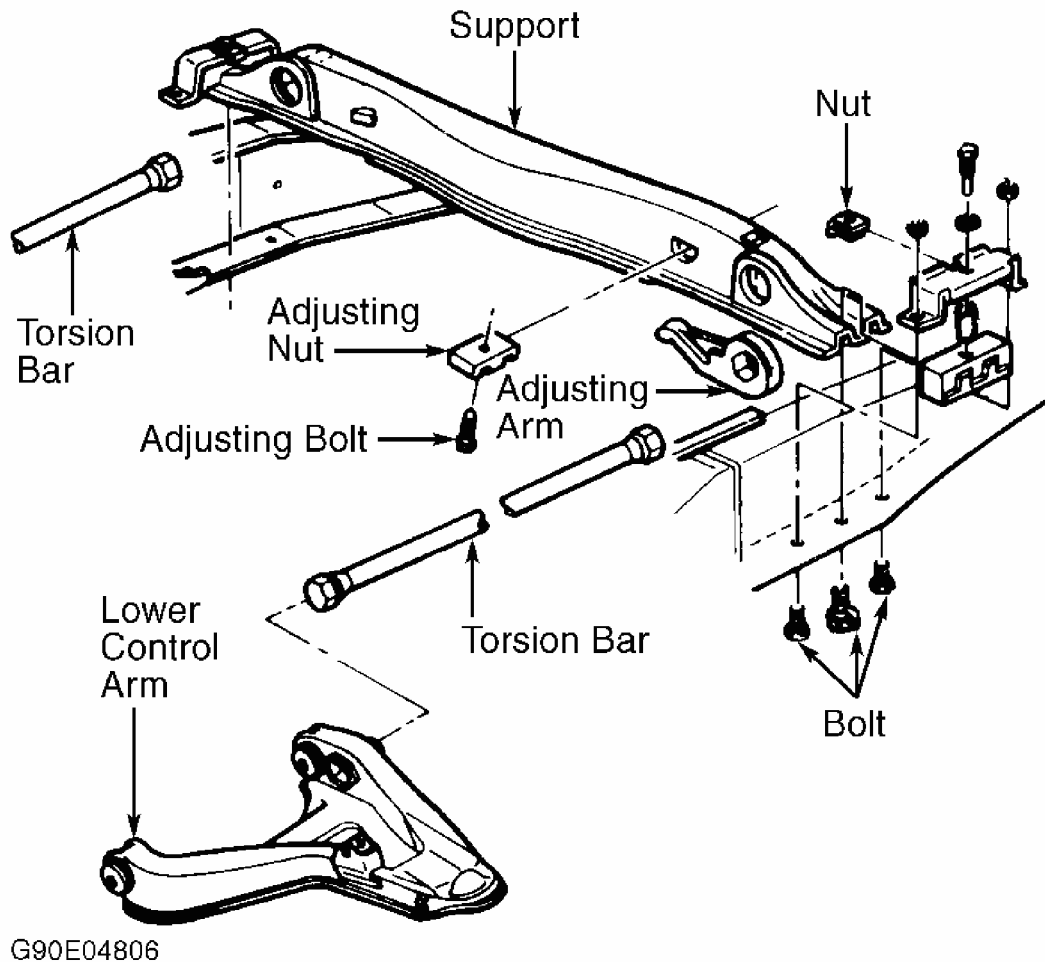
Exploded View Of Torsion Bar & Support Assembly
